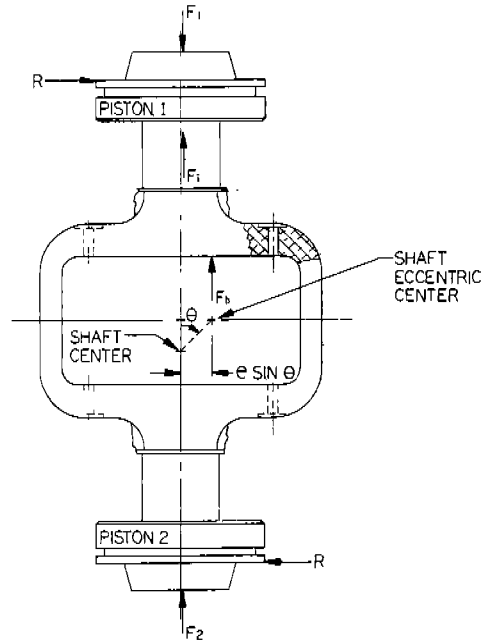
Loading Diagram, Yoke-Piston Assembly.
